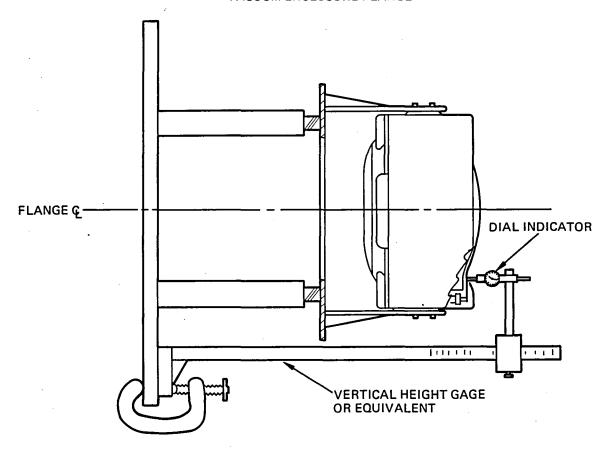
Illustration of procedure used for aligning thruster with the the vacuum chamber axis.
